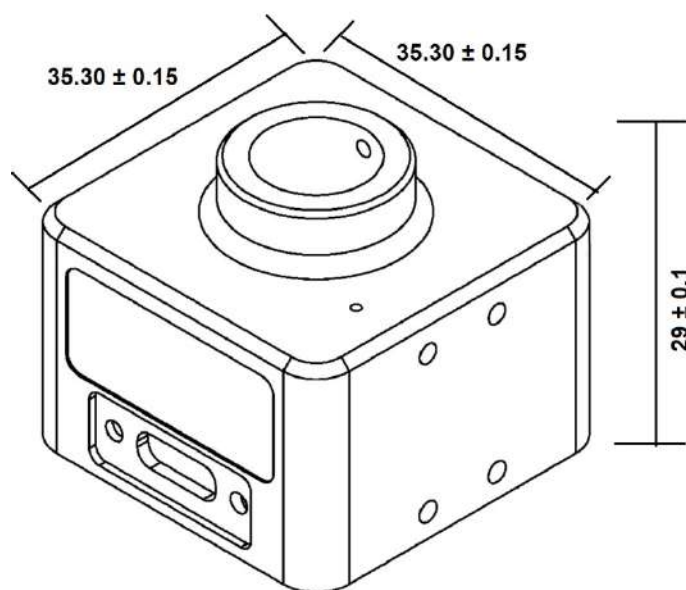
See3CAM_CU135_CH_TC_BX Dimensions (Without lens)
